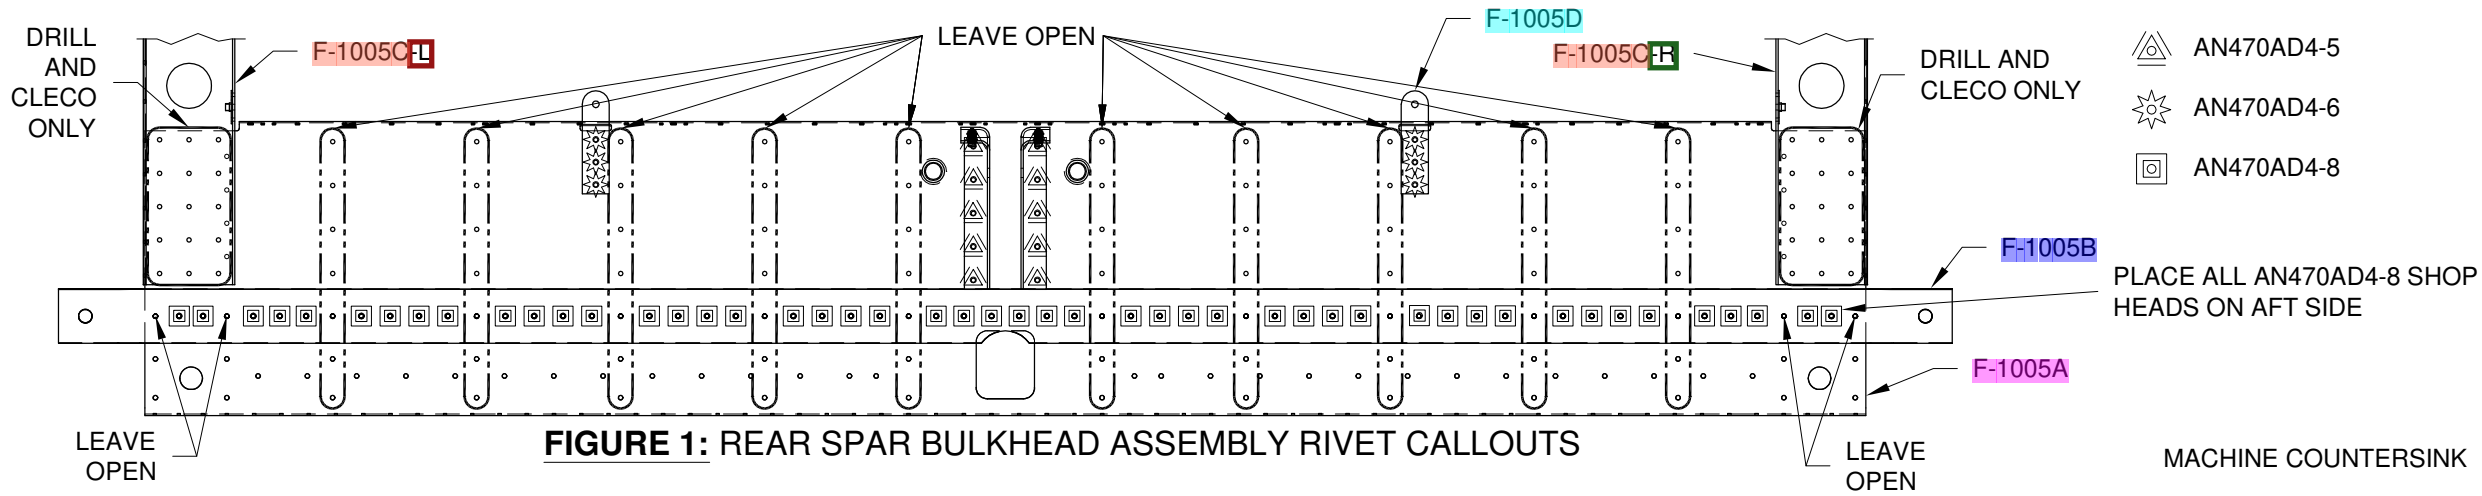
REAR SPAR BULKHEAD ASSEMBLY RIVET CALLOUTS
